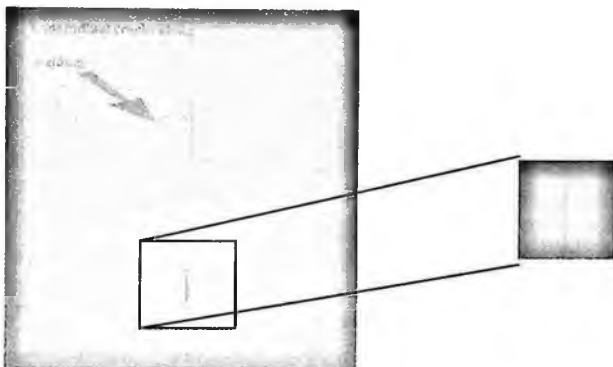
Longitudinal cracks along welding image and test image
